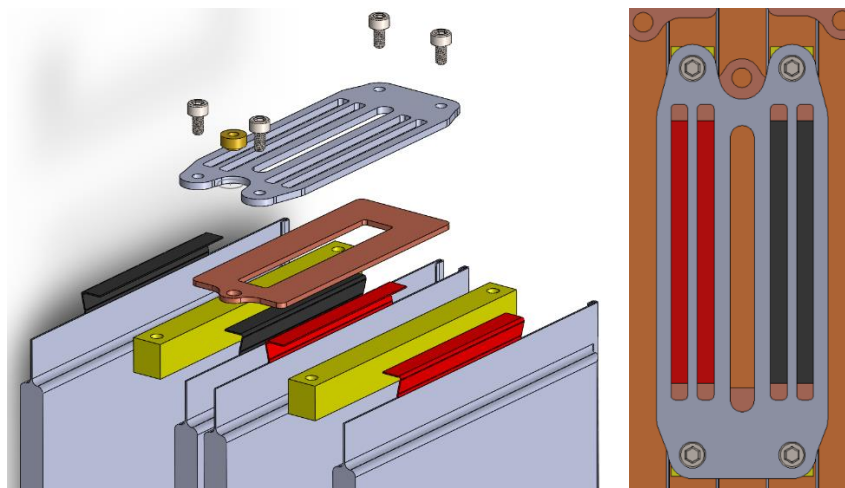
Exploded and top view of the welding mask assembly
